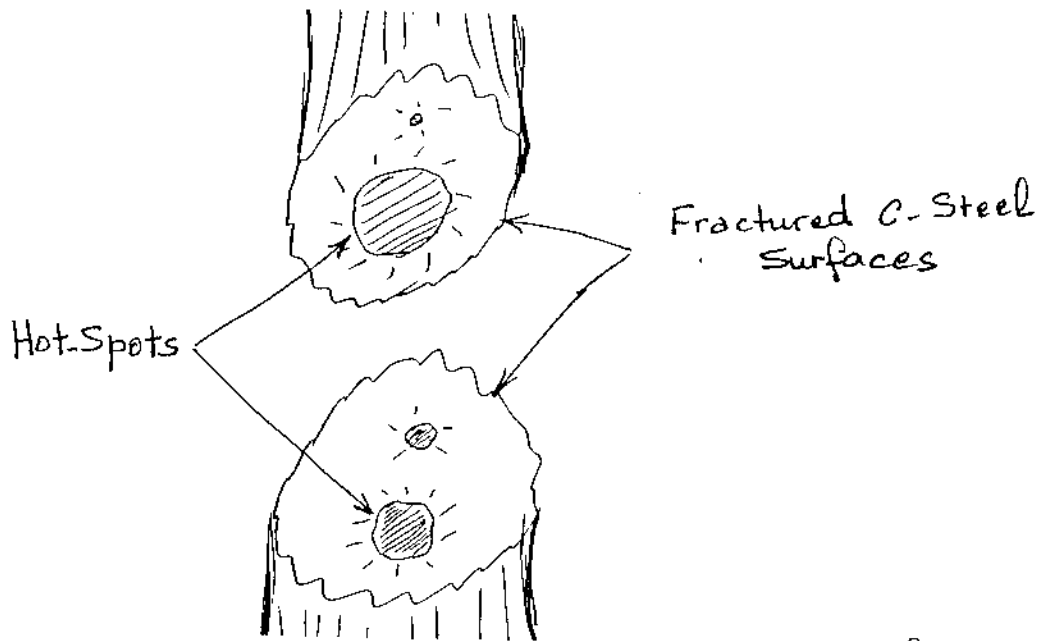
Hot-Spots formed and recorded on Fractured Surfaces
